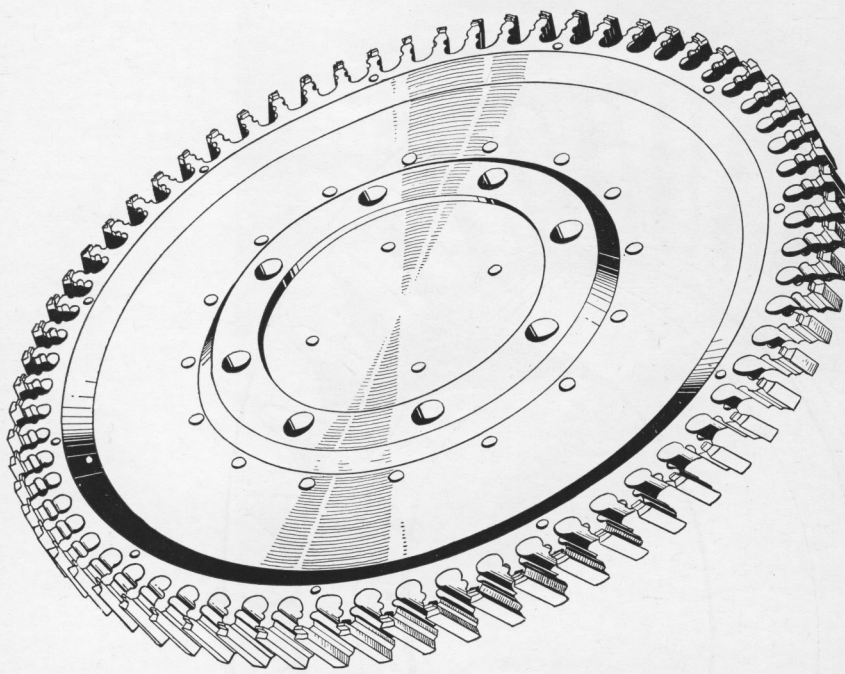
Turbine wheel with machined grooves to receive blades. The first production wheel contained 77 blades; the later, model 003A-2, had 66 stronger blades.
